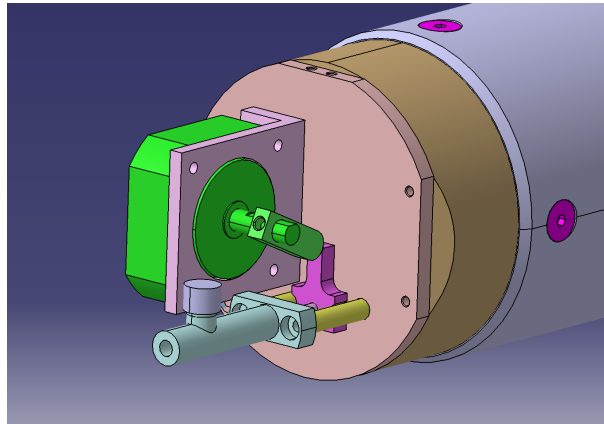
The motor is shown in green with the bar mounted on the shaft of it. The motor runs in counter clockwise direction. The injection gun is shown in light blue and the trigger in purple. Towards the front of the injection gun the magazine in purple is placed. The injector is mounted on the midplane manipulator on the connector in silver on the right.
